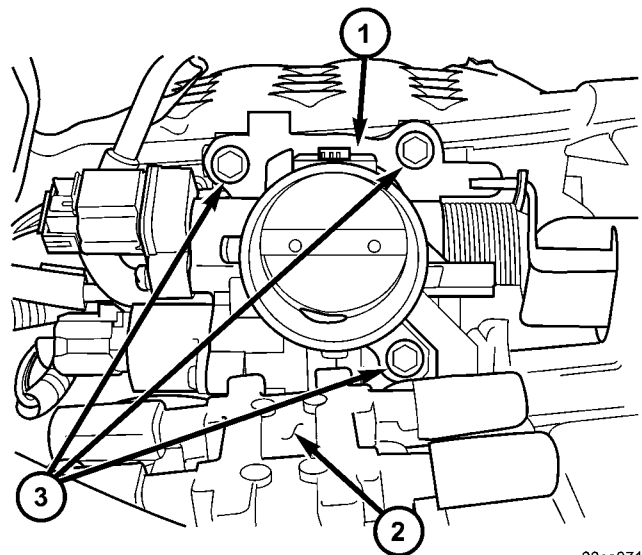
THROTTLE BODY MOUNTING BOLTS - 2.4L
